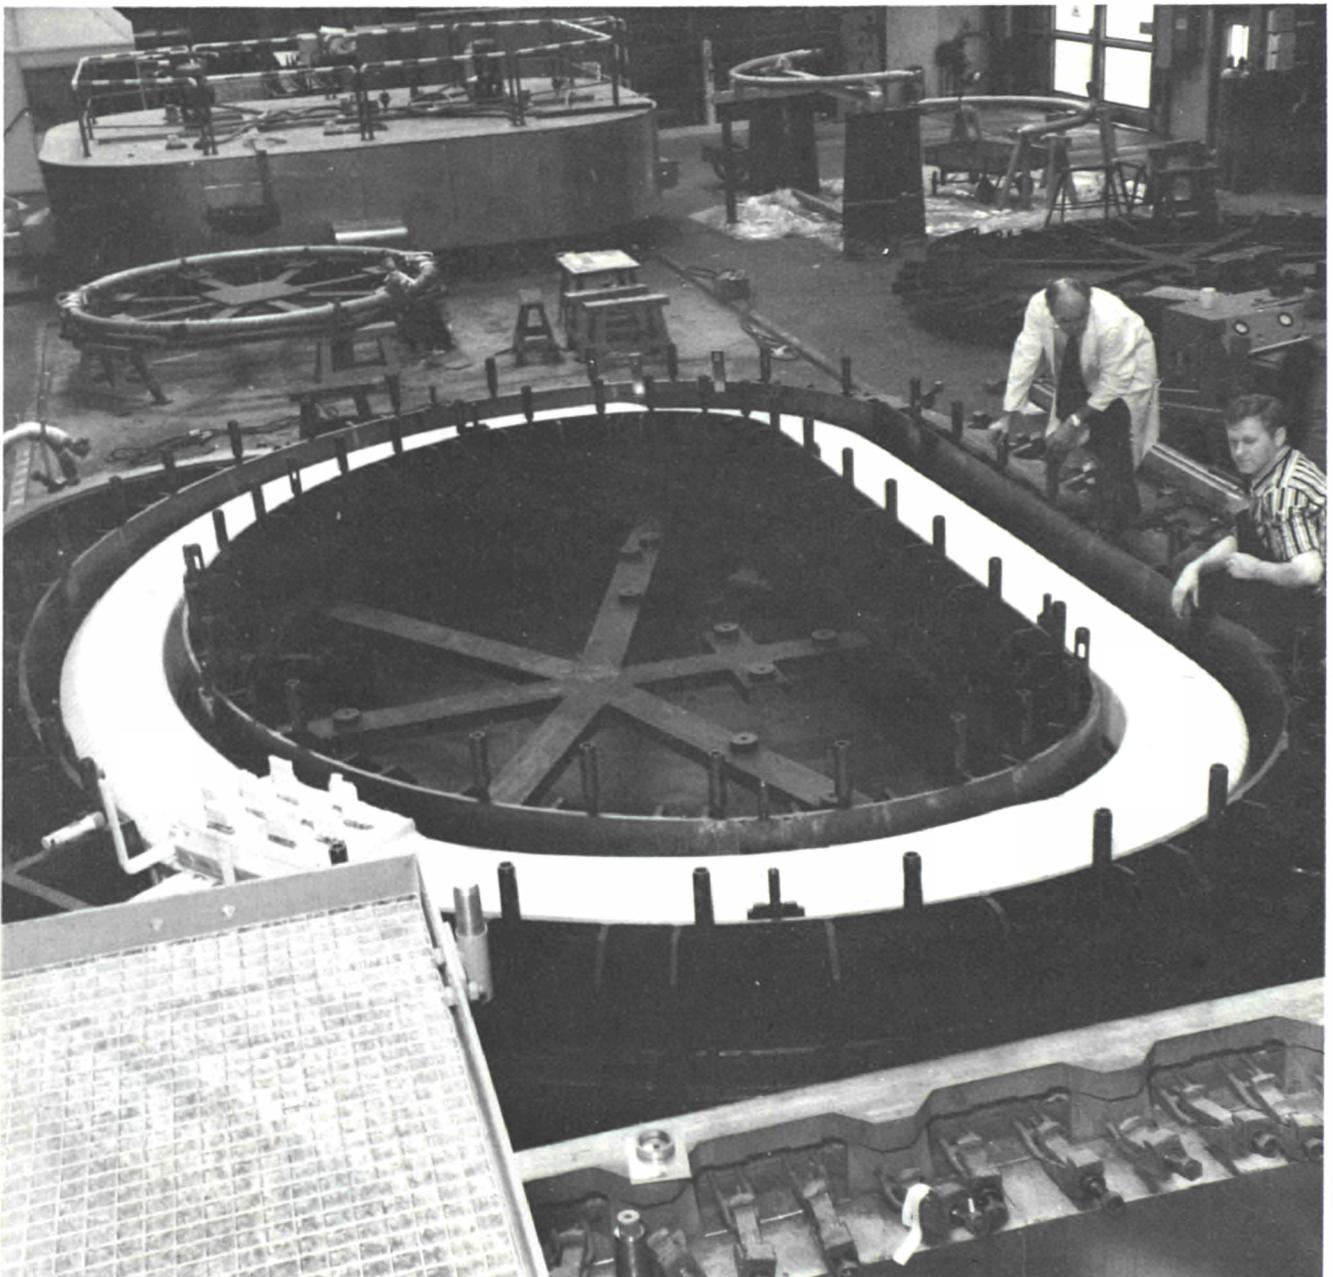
The prototype field coil in the mould ready for vacuum impregnation.
